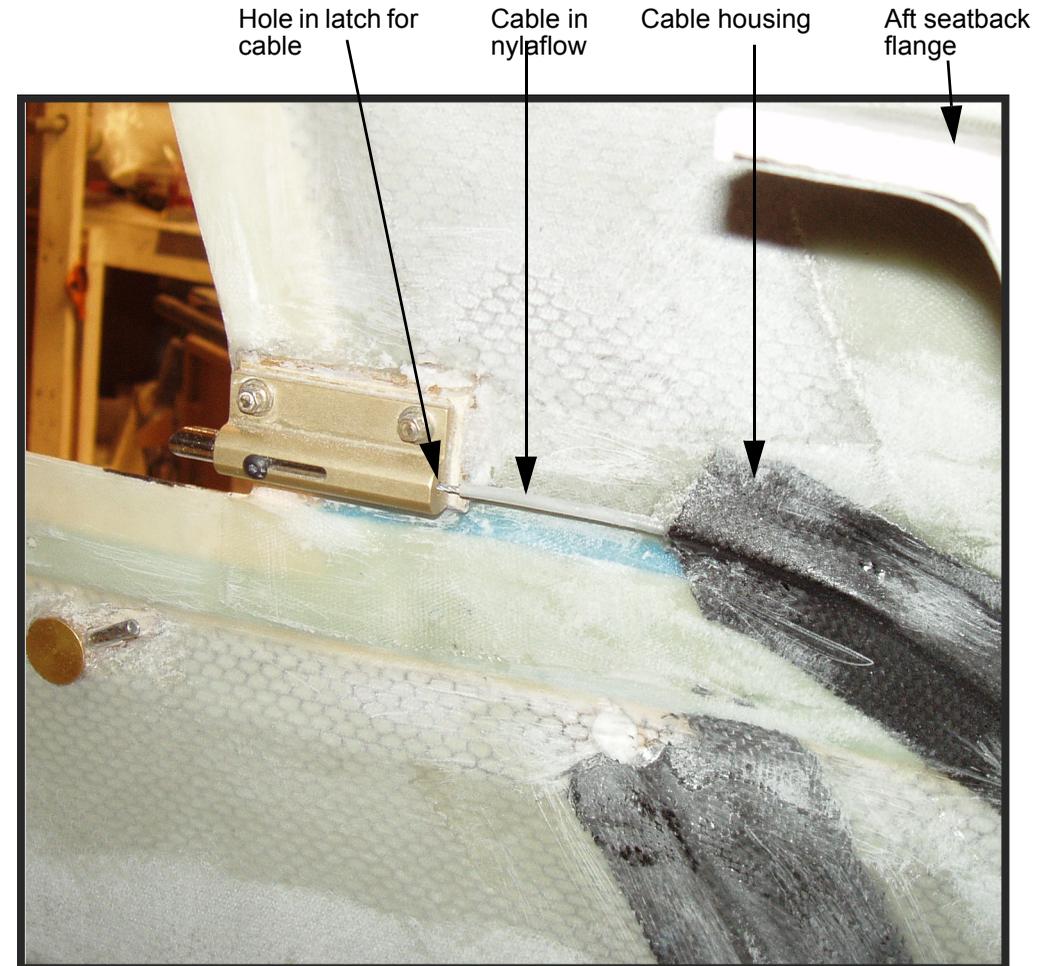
D.1 Cable location for the aft latch on the baggage door
